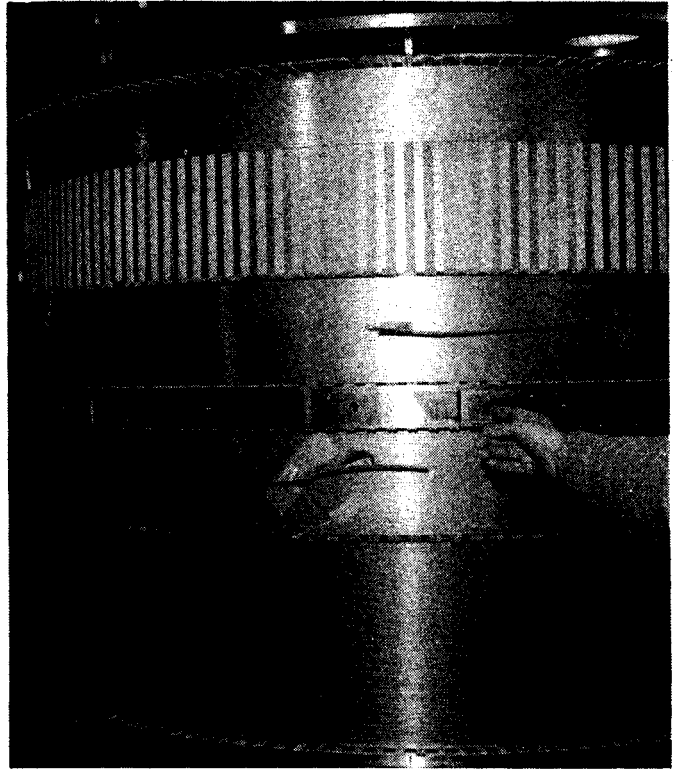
Photograph of the coil near the end of the winding cycle. The hand touches one of the removable stainless steel median plane slabs. Winding of the two small coil sections near the median plane and of the lower large section is completed, and winding of the upper large coil section is nearing completion. The vertical "picket fence" across the upper center is a layer of 40 mil thick G-10 strips inserted between conductor layers, the regions between the strips forming channels for liquid helium. At the point when the photograph was taken, a coil layer is approximately 30% finished and feeding on downward from the left. This will continue over the region where the pickets are exposed after which another layer of pickets will be inserted and winding of a reverse upward layer will begin.
